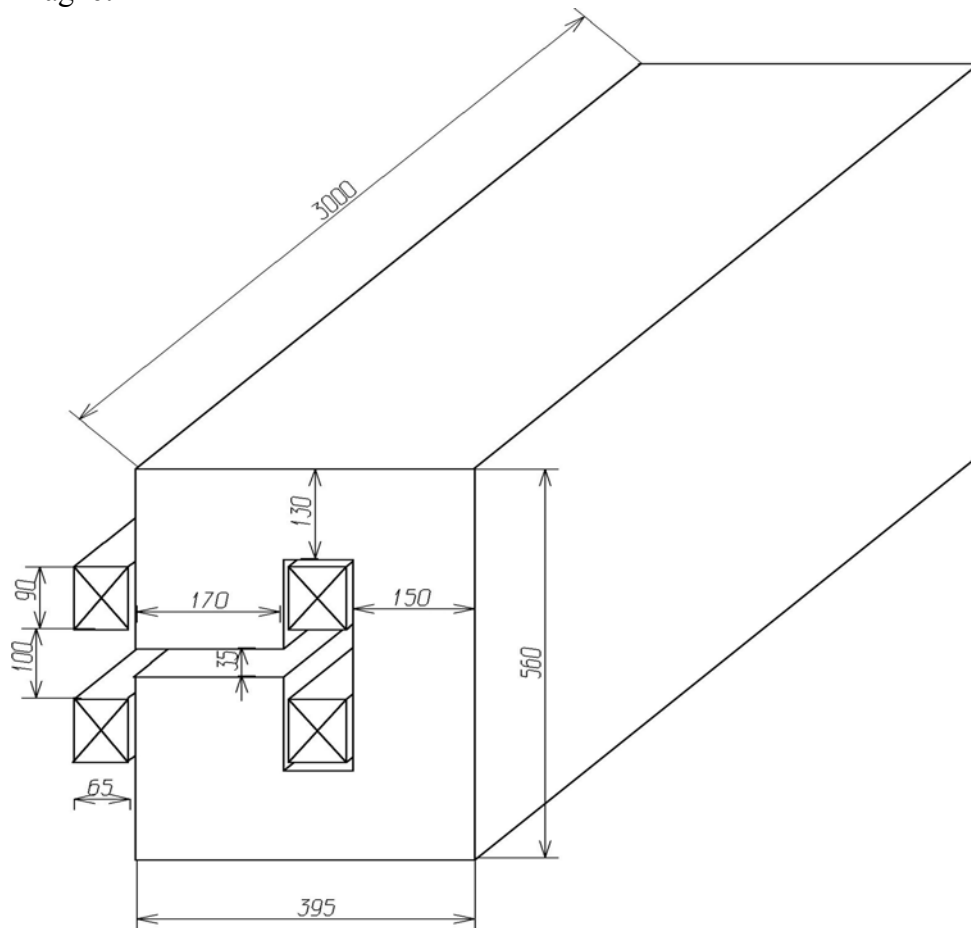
3D view of the spectrometer magnet (dimensions are in mm)
